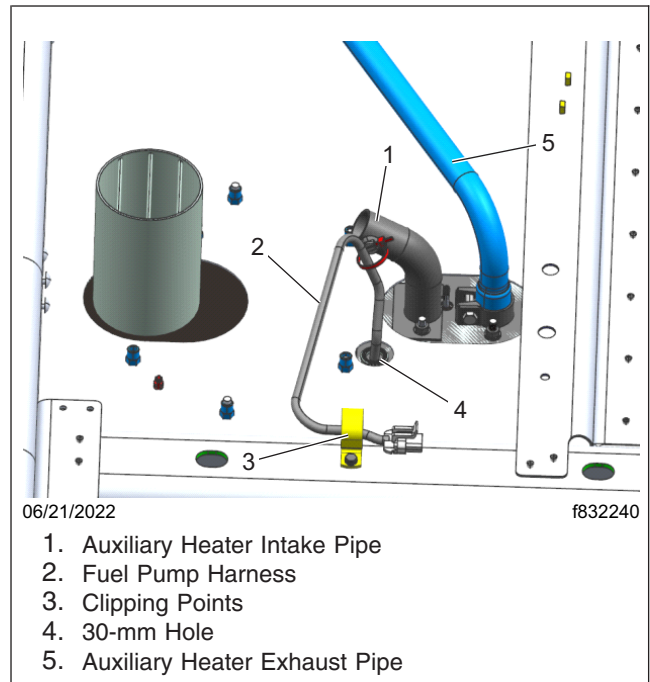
, Auxiliary Heater Exhaust Pipe, Fuel Line, and Clipping Points
